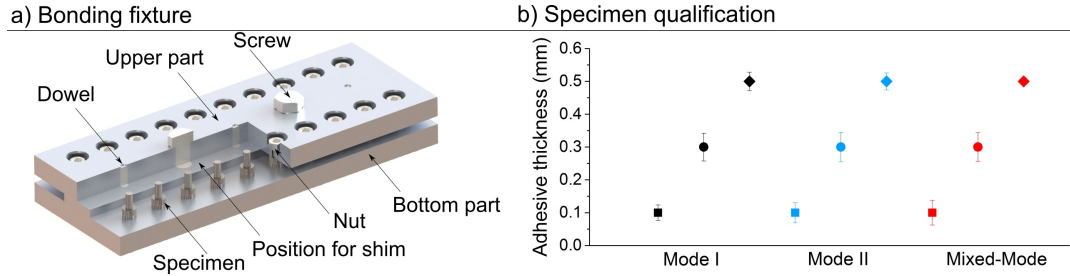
Schematic representation of (a) bonding fixture and (b) bondline measurements.
